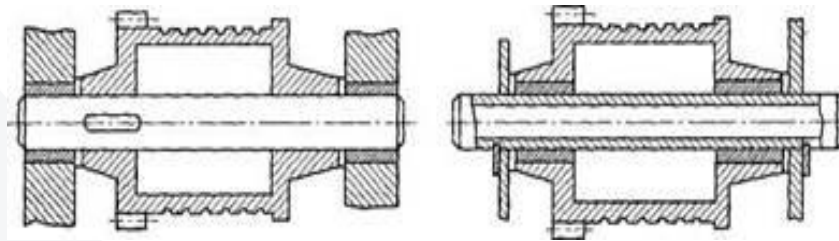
Axle designs: a - rotating axis; b - fixed axle
